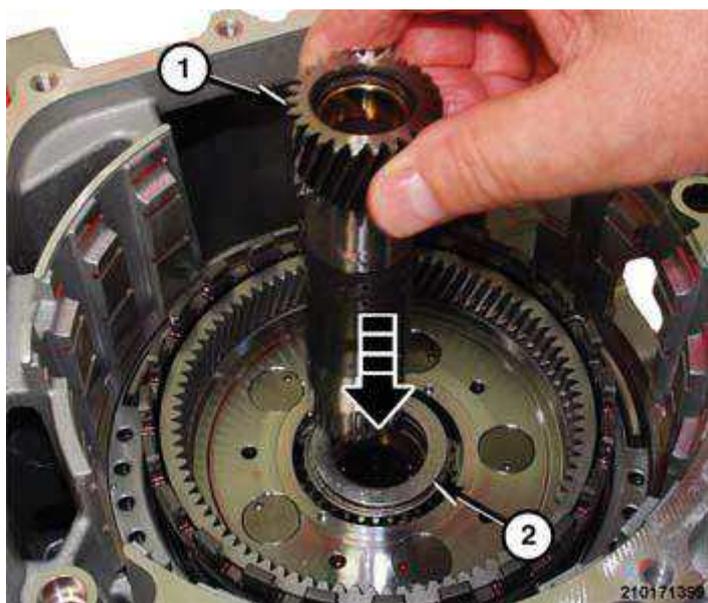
Middle Sun Gear & Planetary Gear Hub
